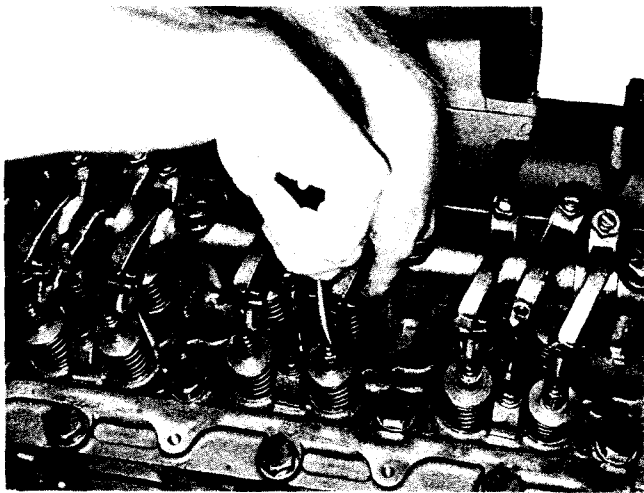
, (V51490). Adjusting crossheads — V-903
